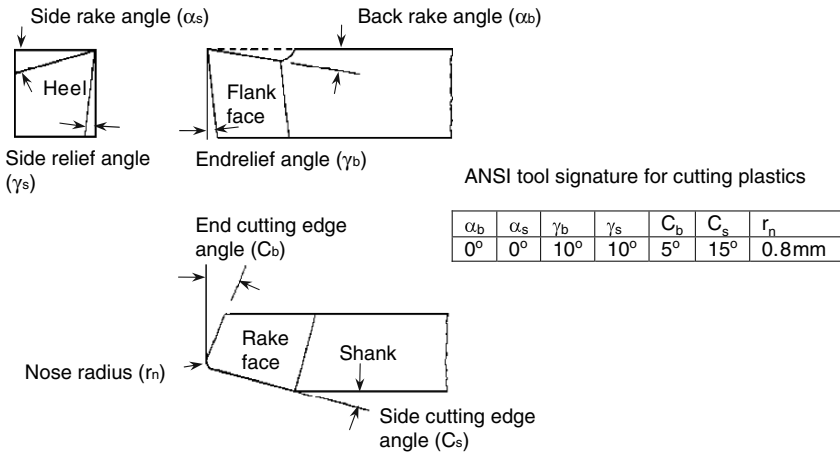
Standard ANSI terminology describing a single point cutting tool
